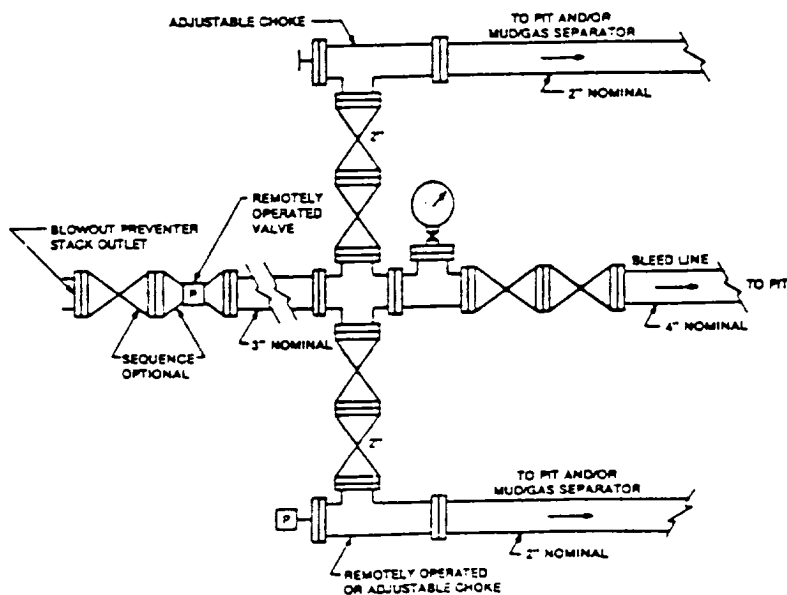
Typical choke manifold assembly for SM rated working pressure service — surface installation.
